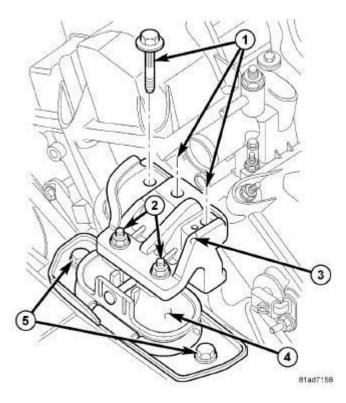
Right Engine Mount Courtesy of CHRYSLER LLC
